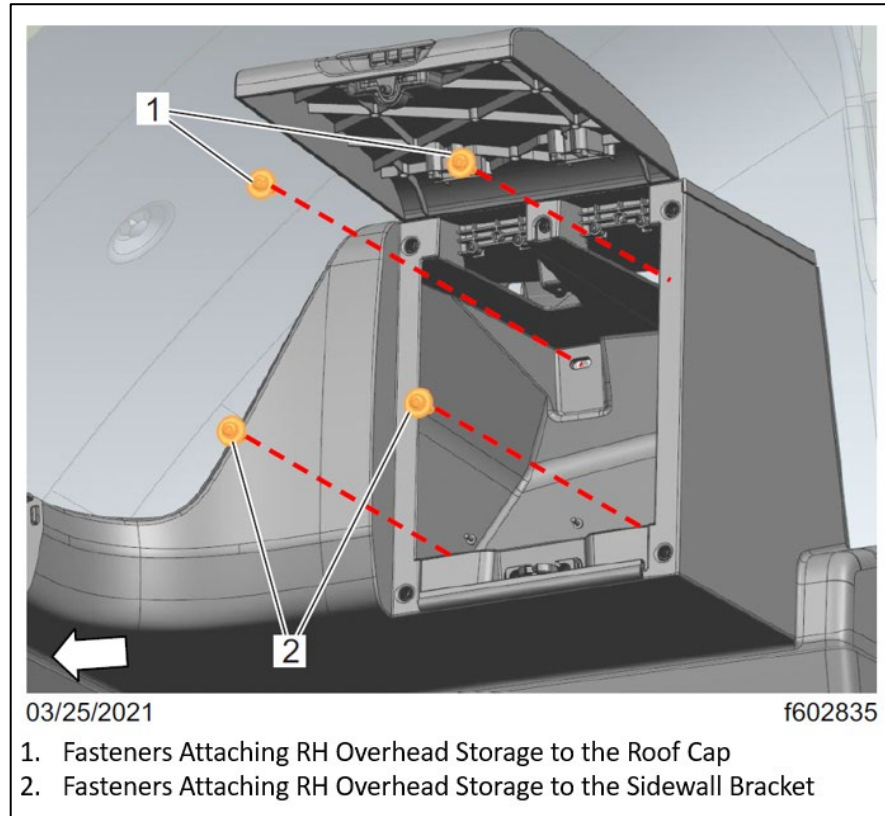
, Fasteners That Attach the RH Overhead Storage Assembly to the Roof Cap and the Sidewall Bracket
